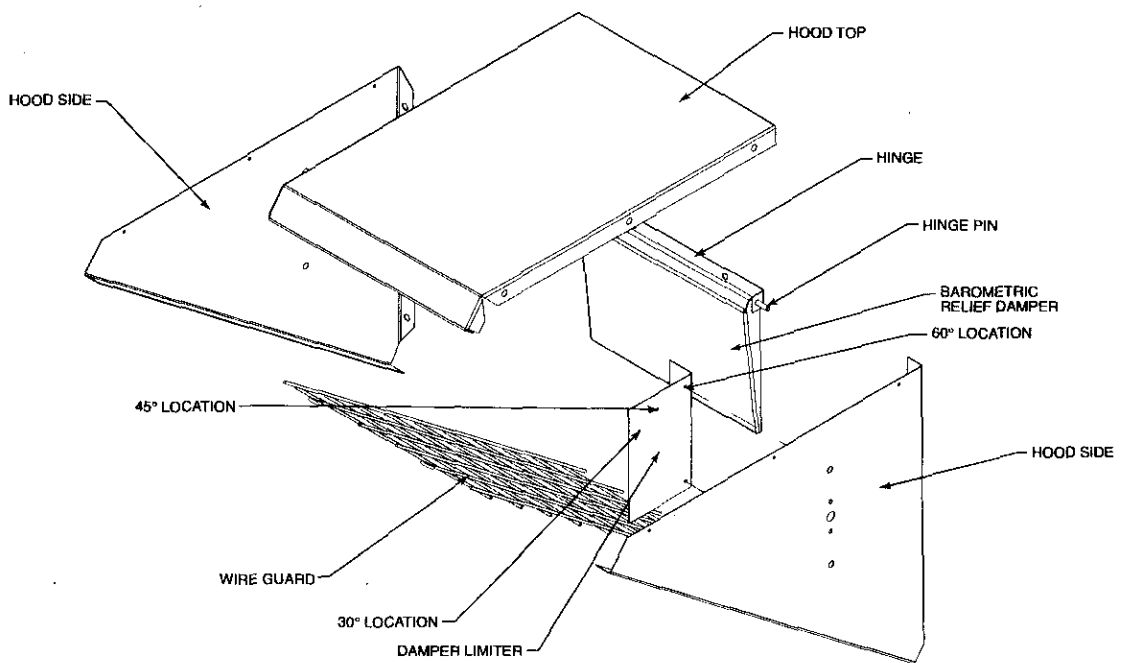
Energy Recovery Section Barometric Exhaust Air Hood Assembly
